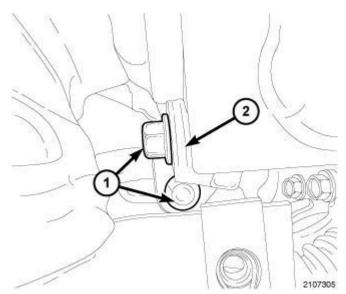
Turbocharger Support Bracket Courtesy of CHRYSLER LLC
